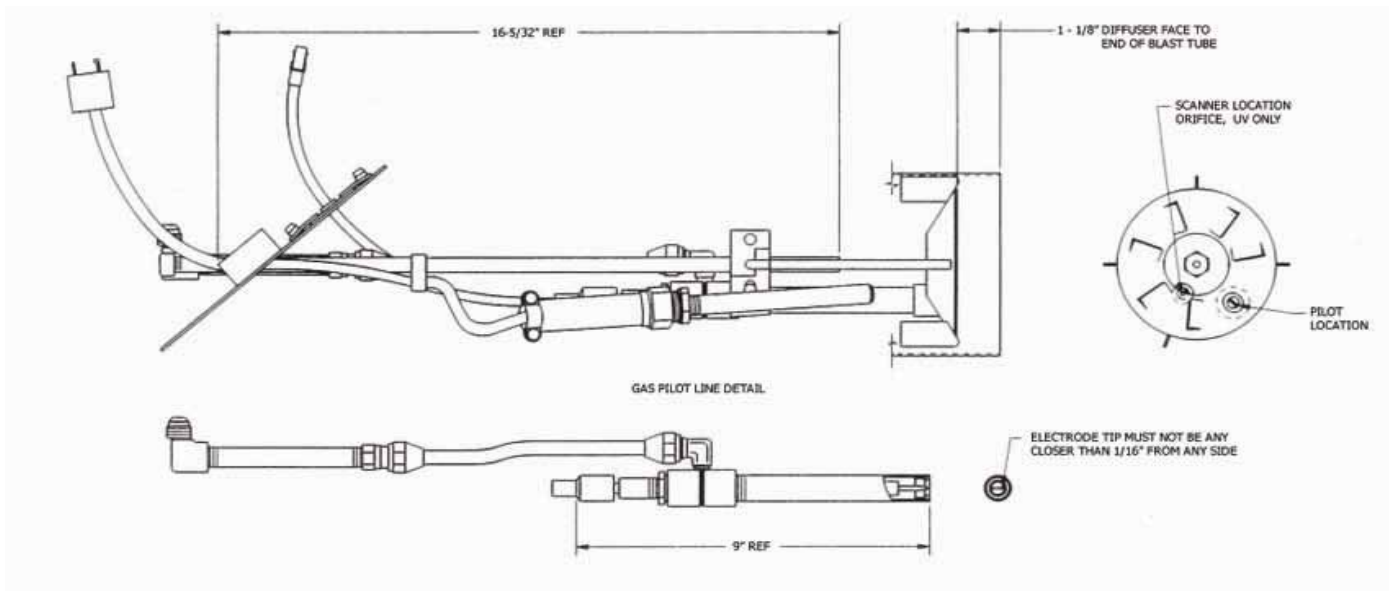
FPG 8, 9, 11, & 12 Drawer Assembly with Gas Pilot
